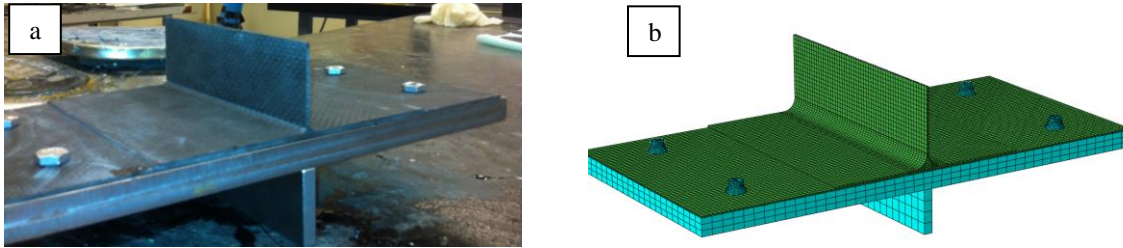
(a) Manufactured test specimen and fixture and (b) FEM with clamped BC
